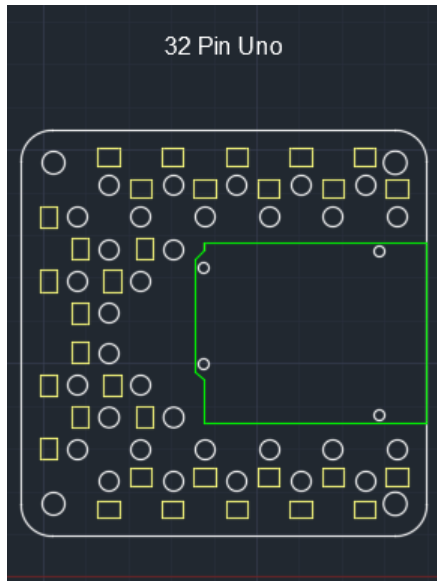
AutoCad Drawing for prototype Arduino Uno Component Board
